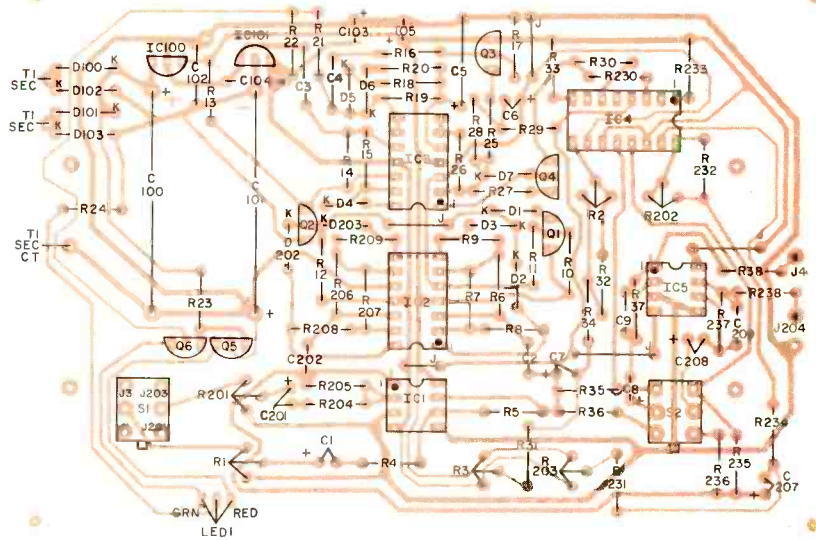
Actual-size foil pattern for the printed-circuit board is shown above.
